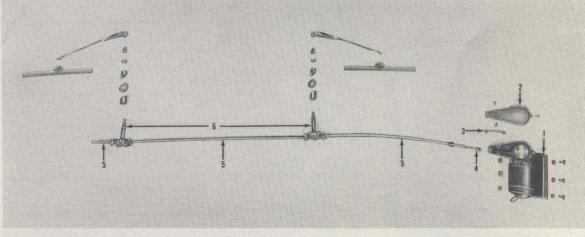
Windshield Wiper and Attaching Assemblies as Removed from Car.
